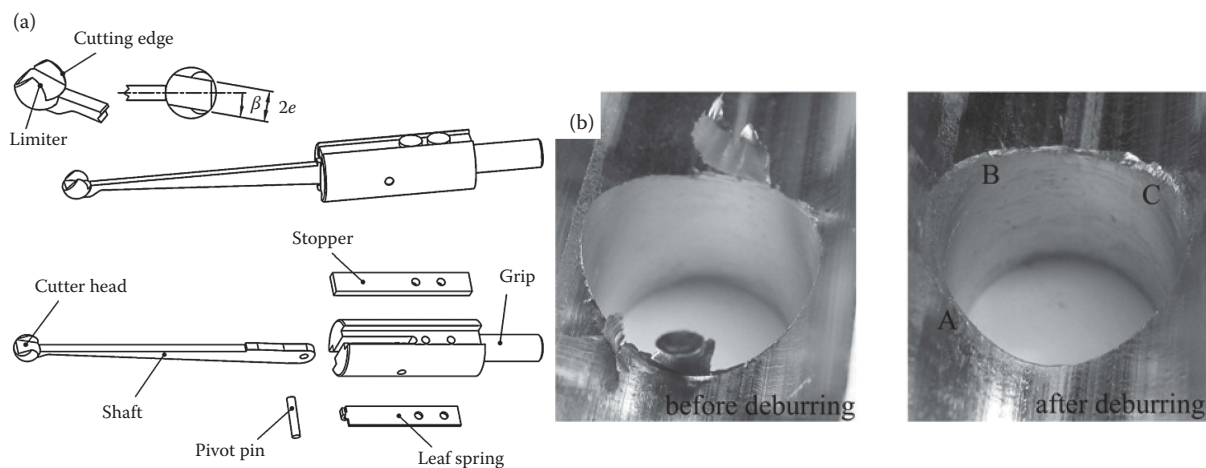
(a) Assembly and individual parts of the deburring tool and (b) micro-holes before and after deburring using the fabricated deburring tool. The points A, B, and C are the same marked positions in the images for before and after deburring in (b)
